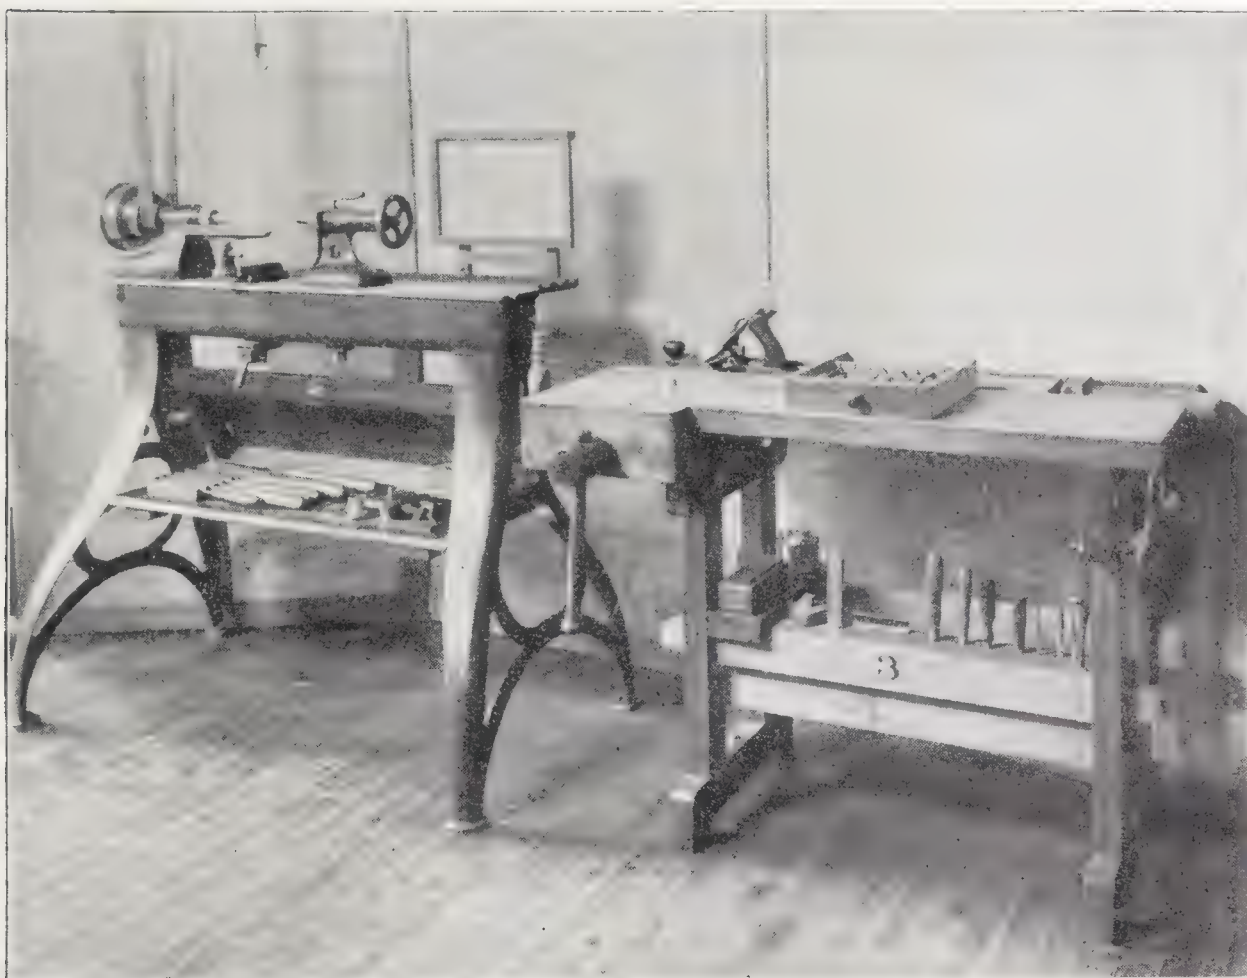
WOODWORKING ROOM—UNIT OF EQUIPMENT.
